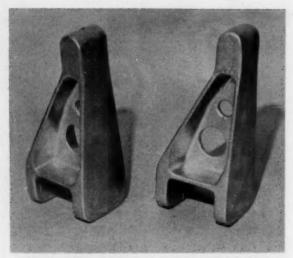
Bracket casting illustrating the surface finish obtained on castings made in machined graphite (right) and rammed graphite (left) molds. Both castings made with shell graphite cores.
